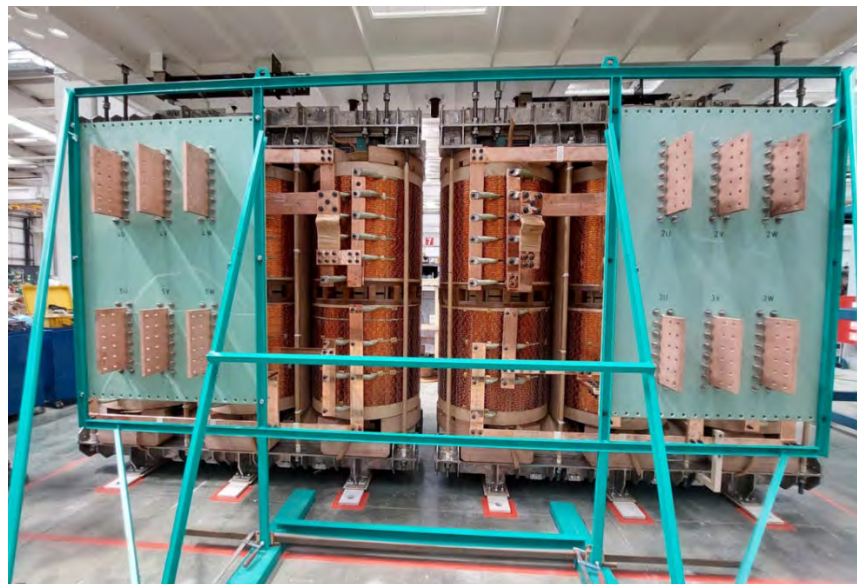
66kV step-down transformer of the Conversion System of the Acceleration Grid Power Supply under final steps of manufacturing.
